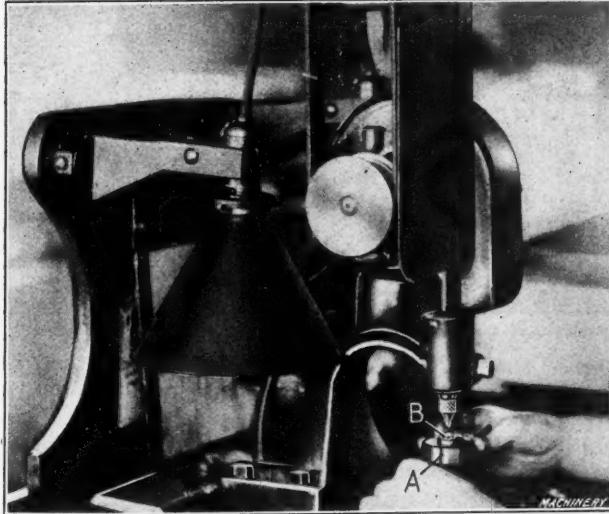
Riveting the Odometer Dials onto the Gear Clusters
